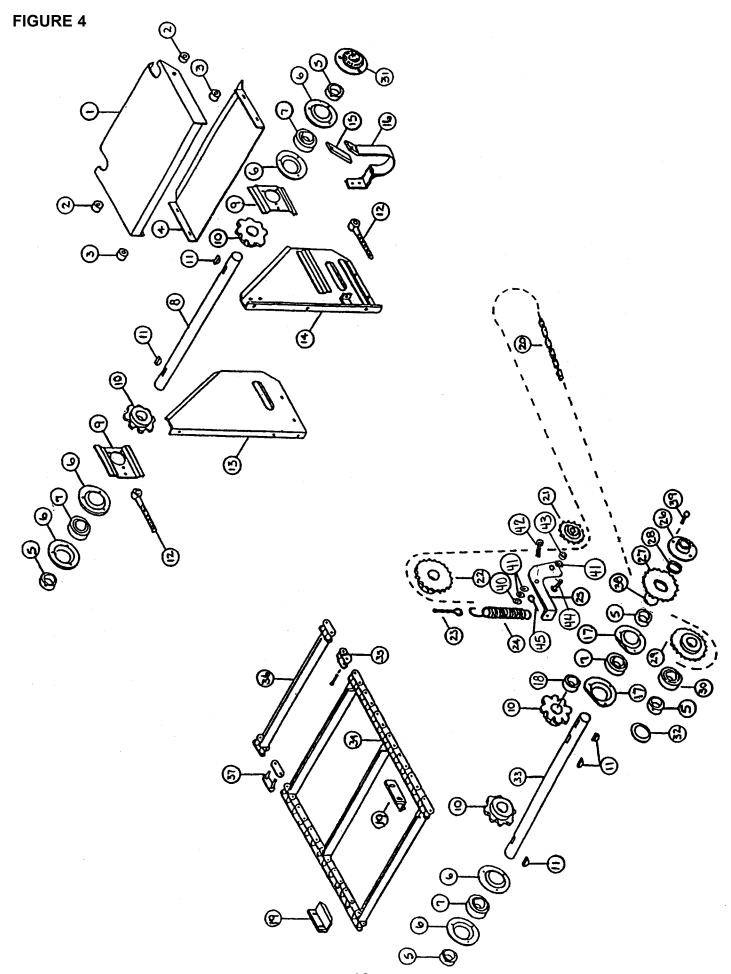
CROSS APRON AND DRIVE ASSEMBLY
